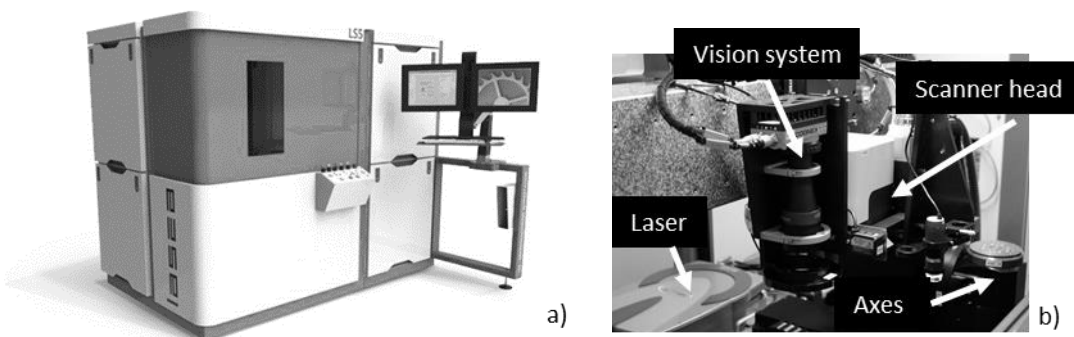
(a) Lasea's machine for the laser hybrid joining, (b) picture of the inside of the machine
